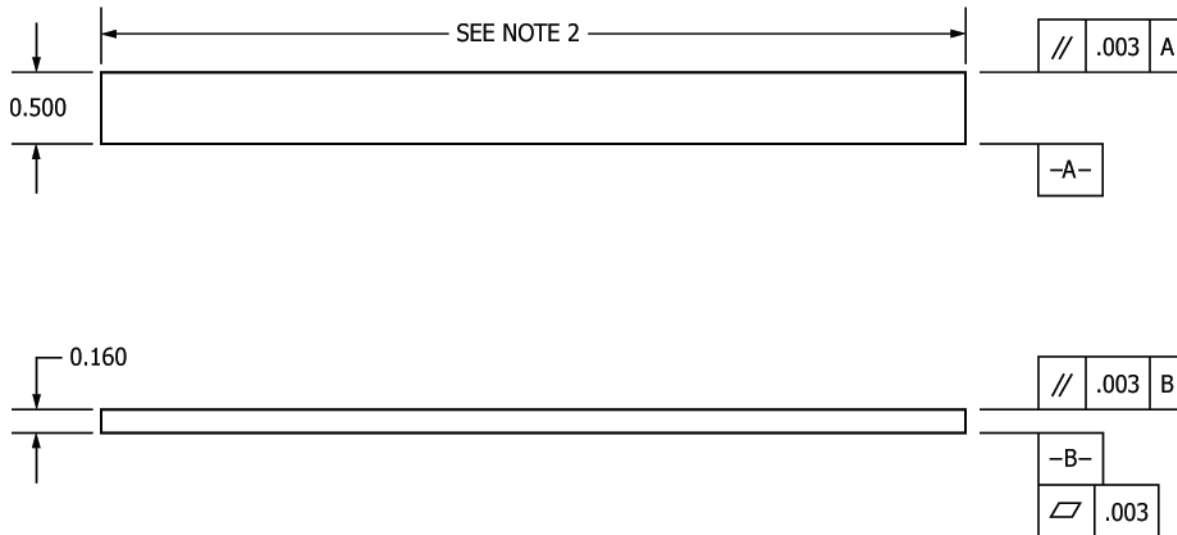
Standard Flexural Test Specimen Drawing (Inch-Pound)
